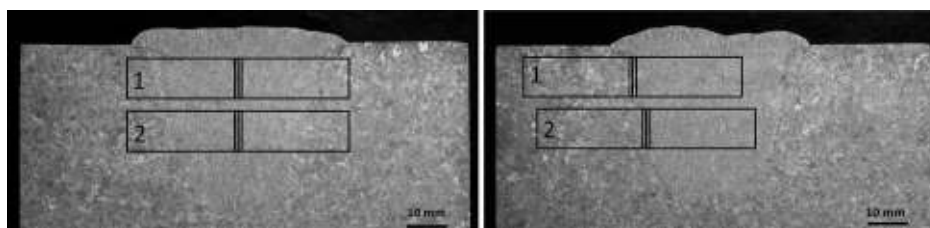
Position of impact specimens in weld metal (left) and HAZ (right)
